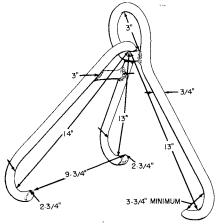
Diesel Engine Lifting Bracket - Hook Type
